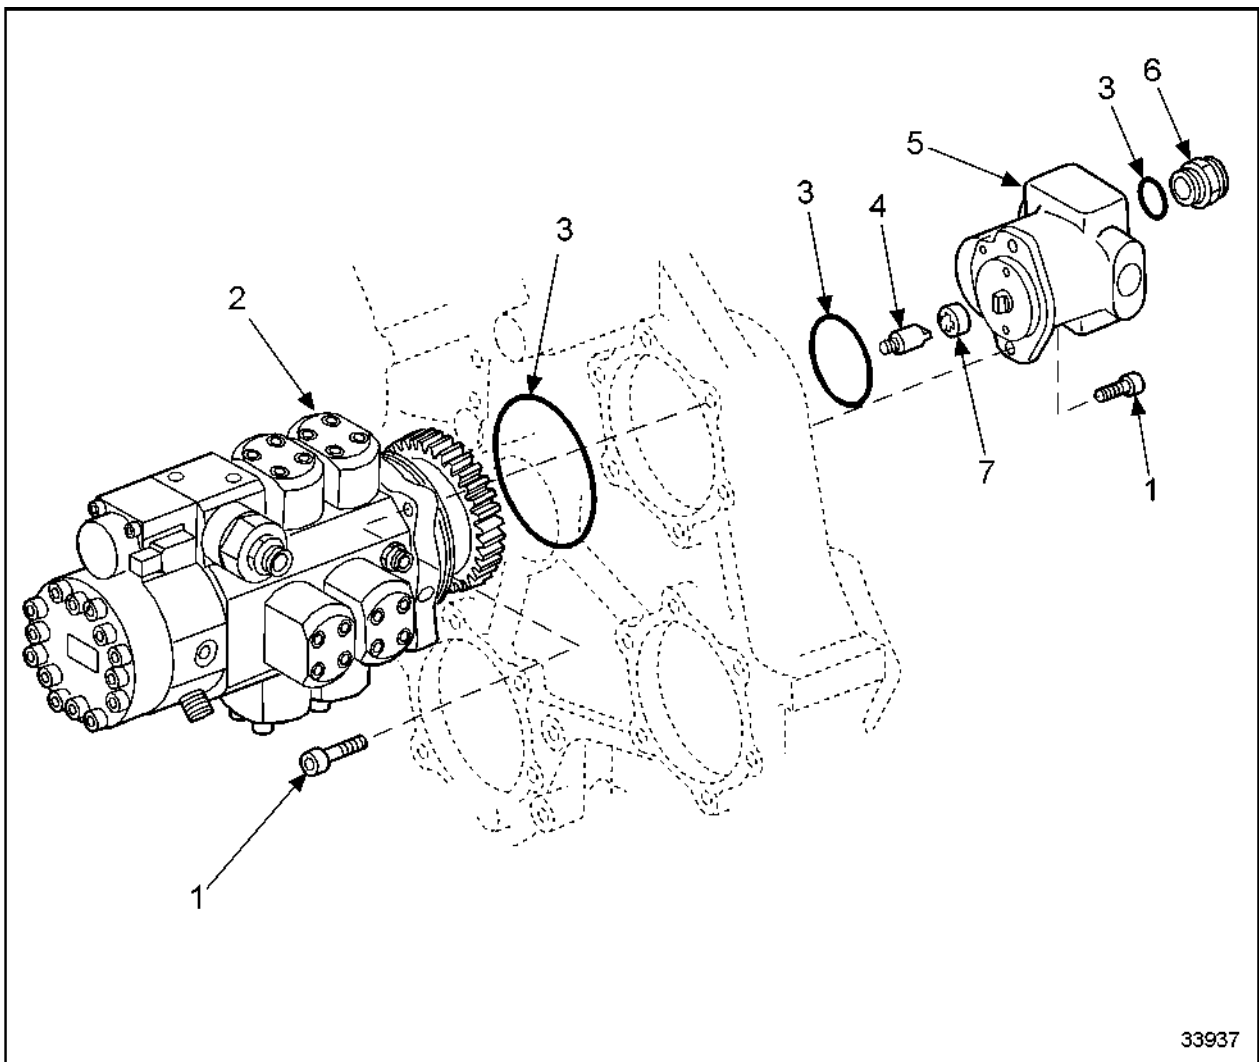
Cutaway View of the High-Pressure Fuel System
